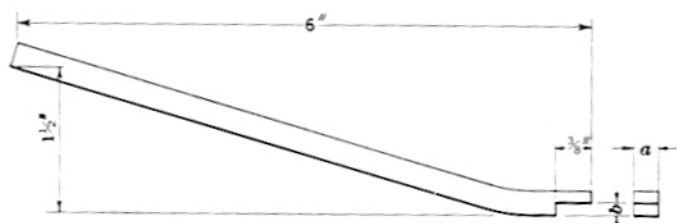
DIMENSIONS OF WEDGE-DRIVING TOOL
